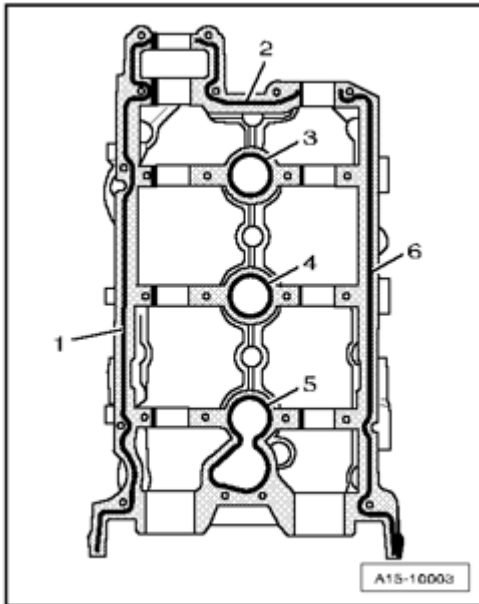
Applying Sealant Beads On Clean Sealing Surfaces Of Guide Frame
